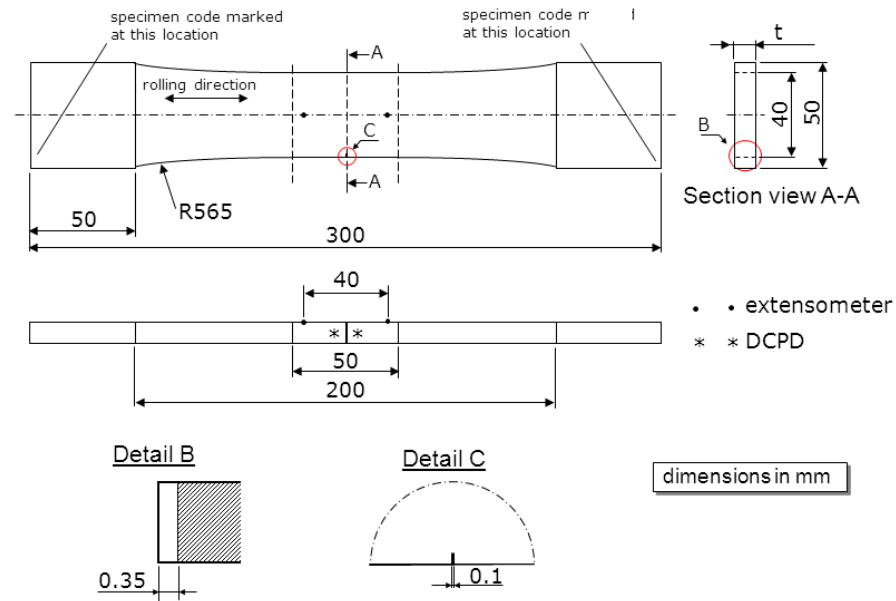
Single edge crack tension (SET) fatigue crack growth specimen
